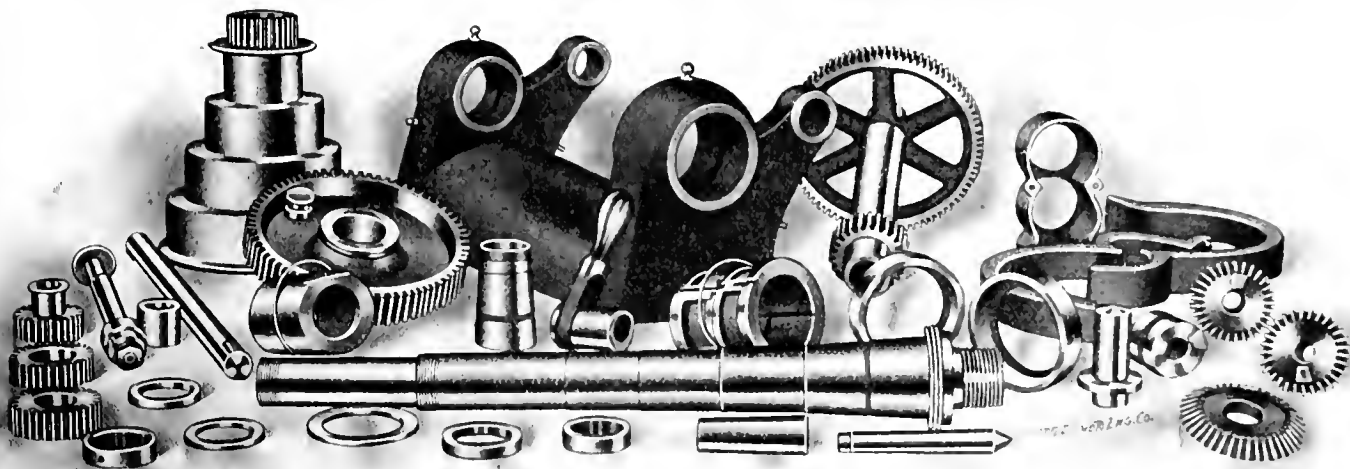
View of Unassembled Lathe Head, showing the Various Parts
